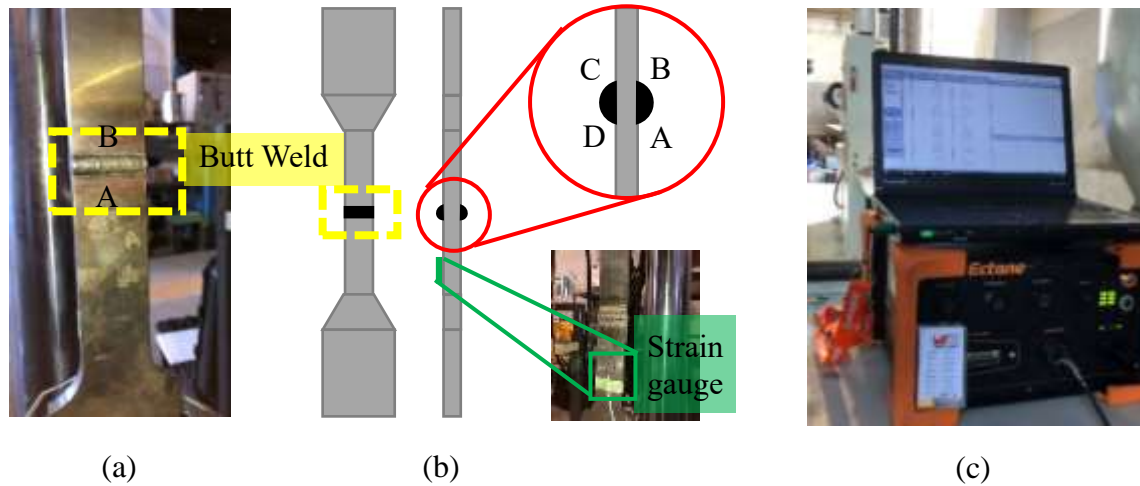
(a) Butt-welded tensile specimen, (b) Front and side views of the tensile specimen showing the four locations of eddy current measurement – A, B, C, and D, and the location of strain gauge, and (c) Ectane and laptop for Magnifi
